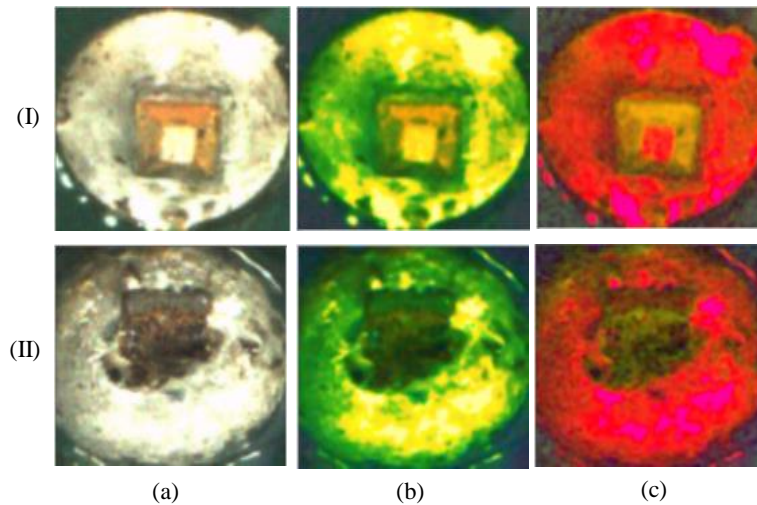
Colour transformation from RGB to HSL and RGB to HSV colour models for the classification of excess solder. (a) Solder joint. (b) RGB to HSL. (c) RGB to HSV. (I) Good joint. (II) Defective joint
